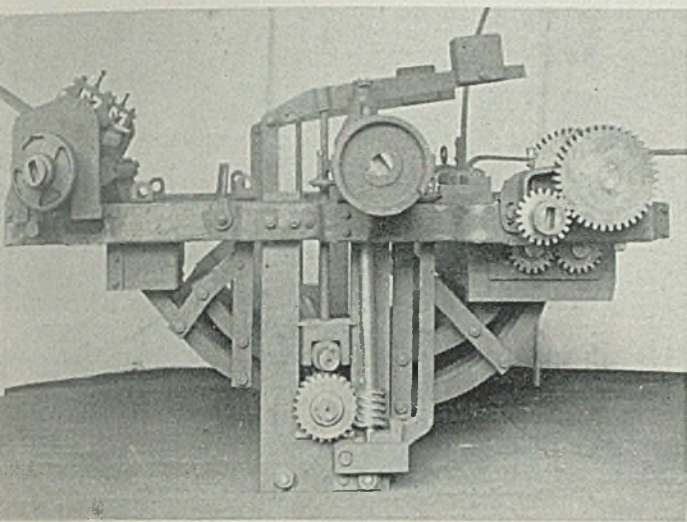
(Opposite page)—Sheet galvanizing machine in operation in the sheet galvanizing pot. United Engineering & Foundry Co. photos
